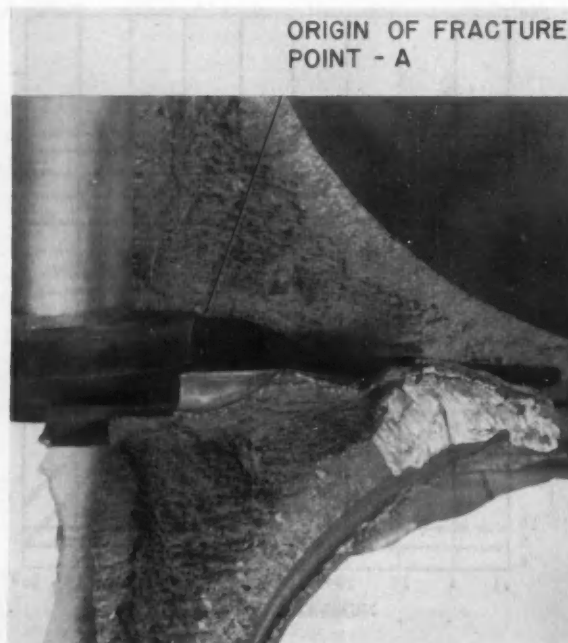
Compressor rotor was cycled to fracture in spin pit. Fracture started at juncture of slot and counterbore.
